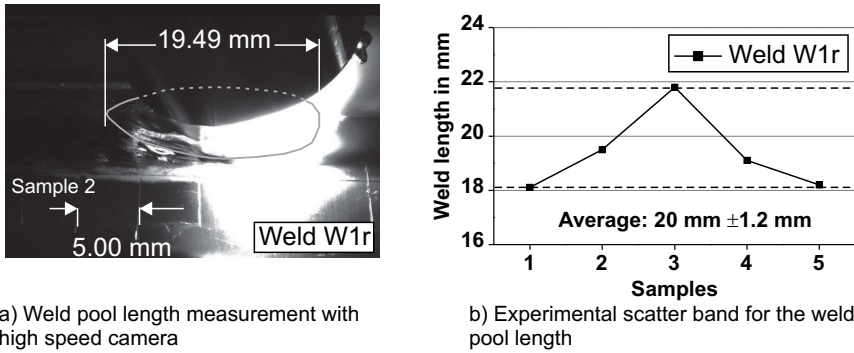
Experimental scatter band of the weld pool length, crossbeam, MIG welding overlap joint, material thickness 2.8 mm, $U_{ave} = 162$ V, $I_{ave} = 22$ A and $v_s = 100$ cm/min
